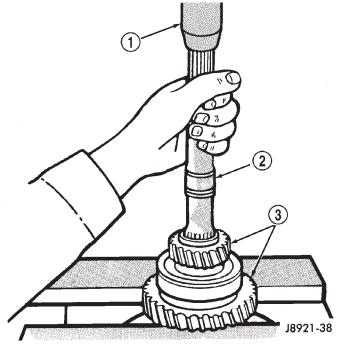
Remove Fifth Gear, First Gear Bearing, And Race
